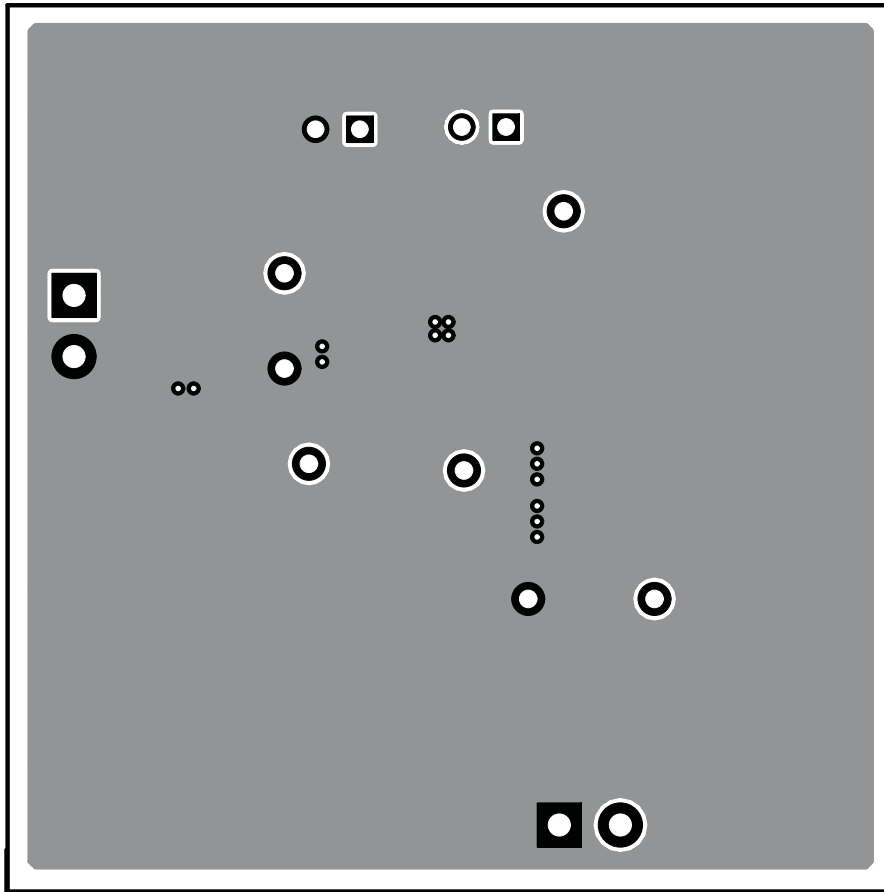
TPS54218EVM-511 Bottom-Side Layout
